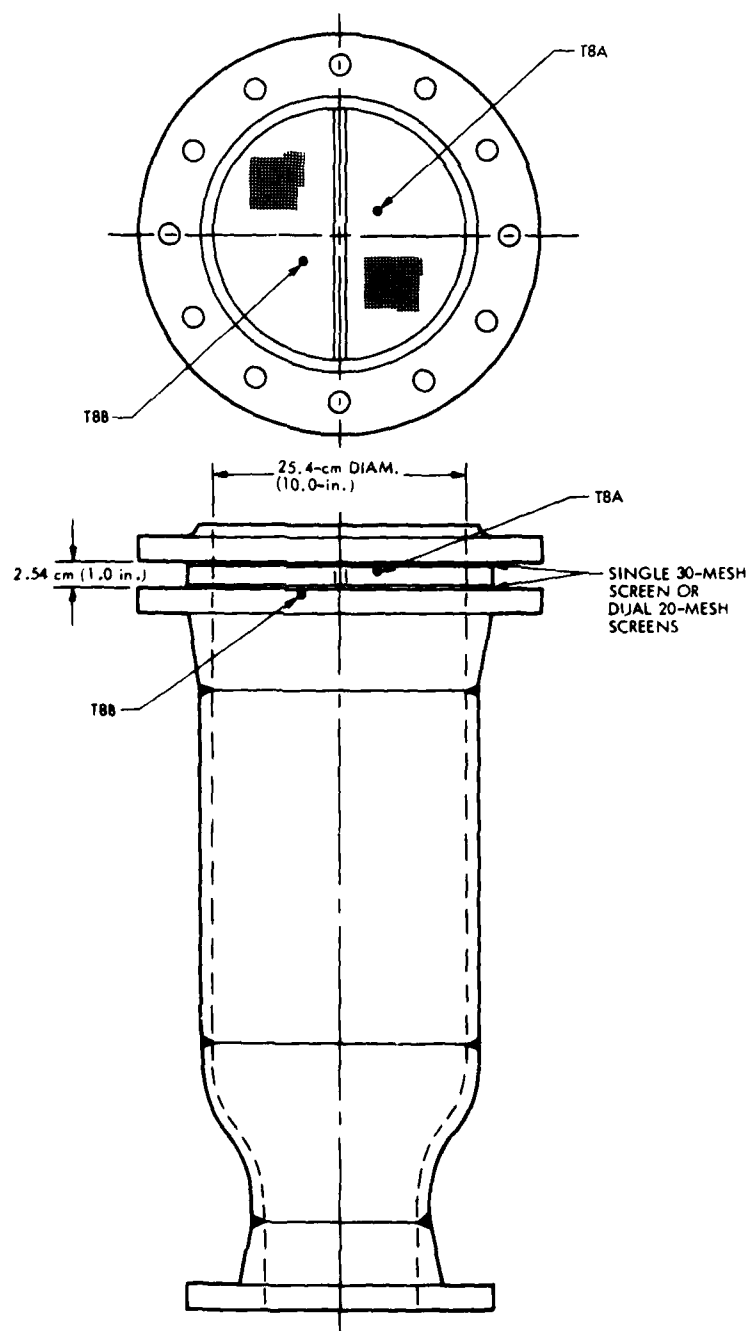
Screen-Type Arrester Test Assembly, 25.4-cm Diameter, Schematic Drawing
